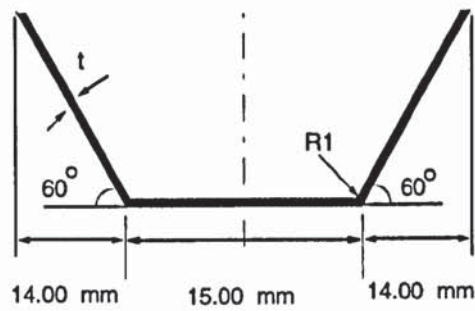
Trapezoidal Section ( CRF Mill No:1).
